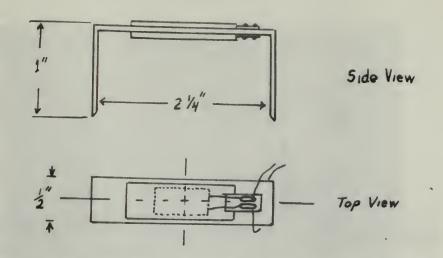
CLIP GAUGE EXTENSOMETER (DIMENSIONS)
